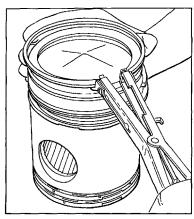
Removing or Installing Piston Ring using Tool J 8128
